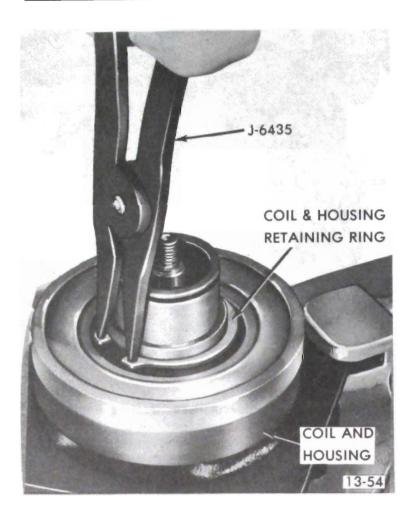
Removing or Installing Coil and Housing Retainer Ring
